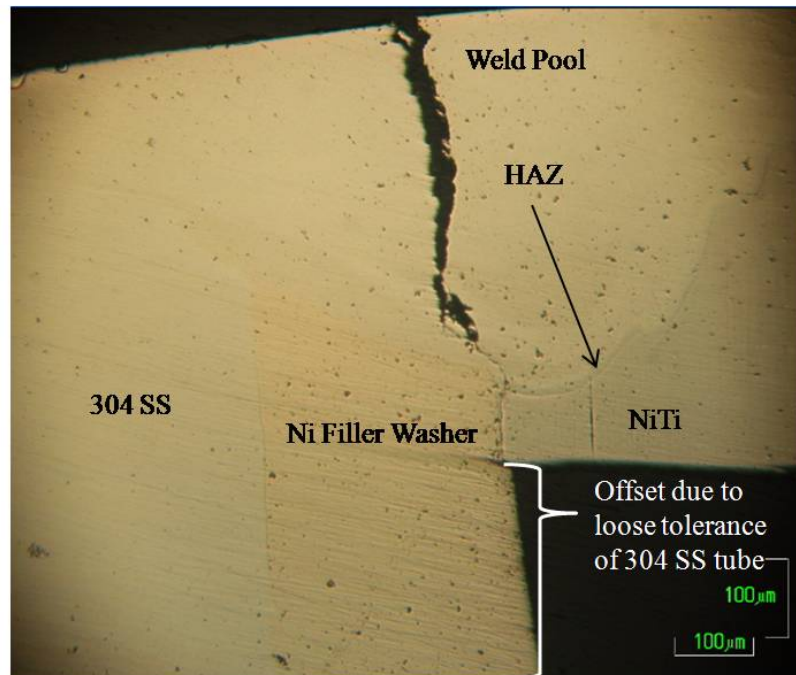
Laser weld section showing cracks due to misalignment of NiTi and 304 SS tube walls due to eccentricity in the outer and inner diameters of the 304 SS.
